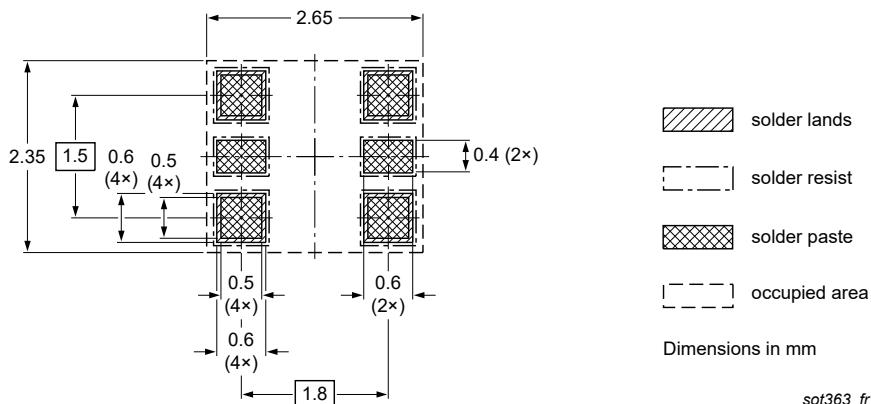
Reflow soldering footprint for TSSOP6 (SOT363)
